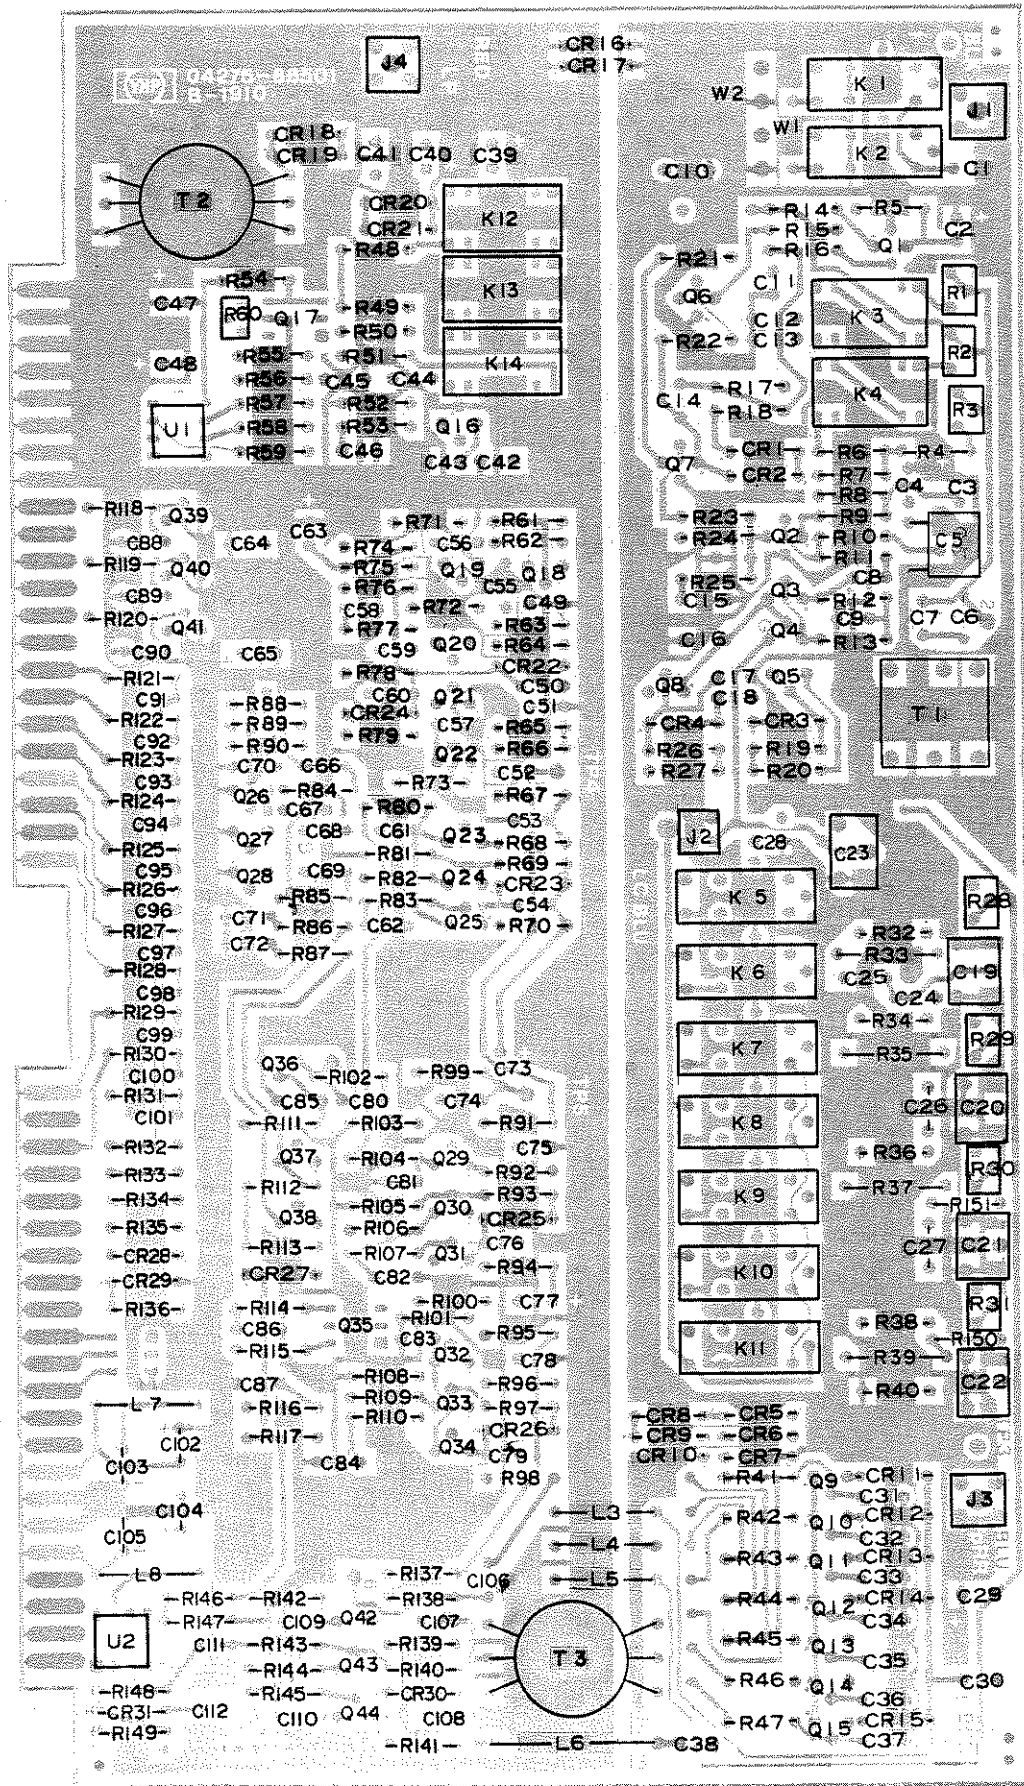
AI Range Resistor and Null Detector Board Assembly Component Locations.
